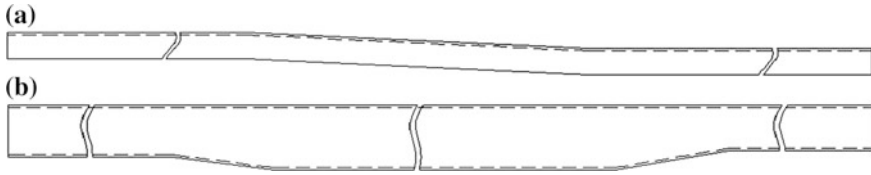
Longitudinal member of a truck frame: a top view, b side view
